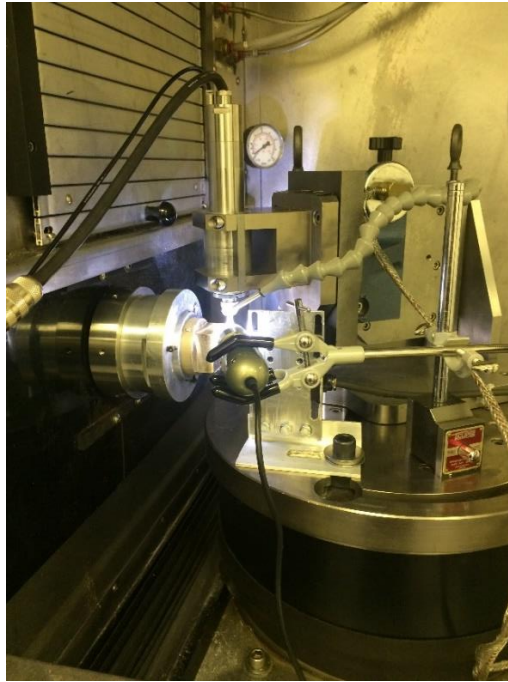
Complete setup in position ready for grinding (Grinding wheel and workpiece obscured)
